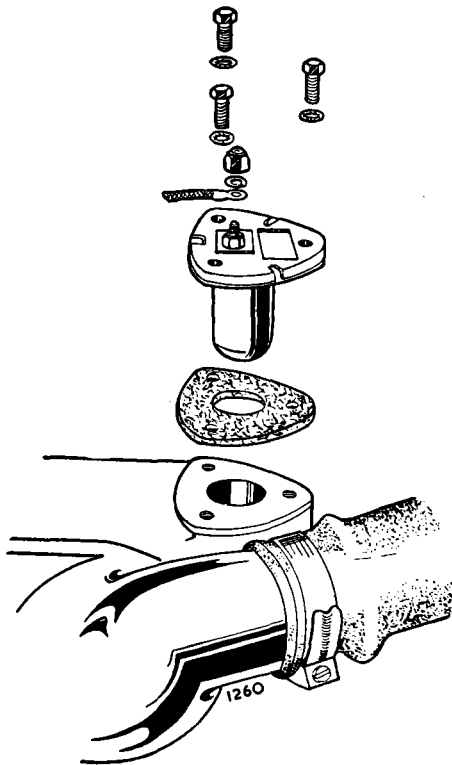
Removal of the auxiliary starting carburetter thermostatic switch.
